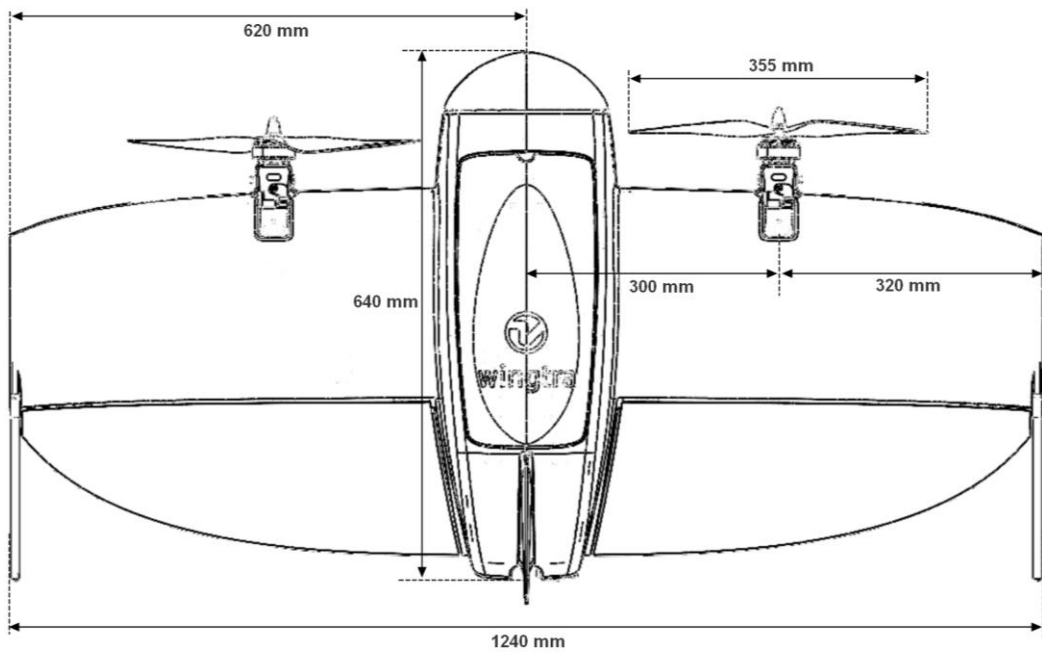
WingtraOne Gen II dimensions - plan
